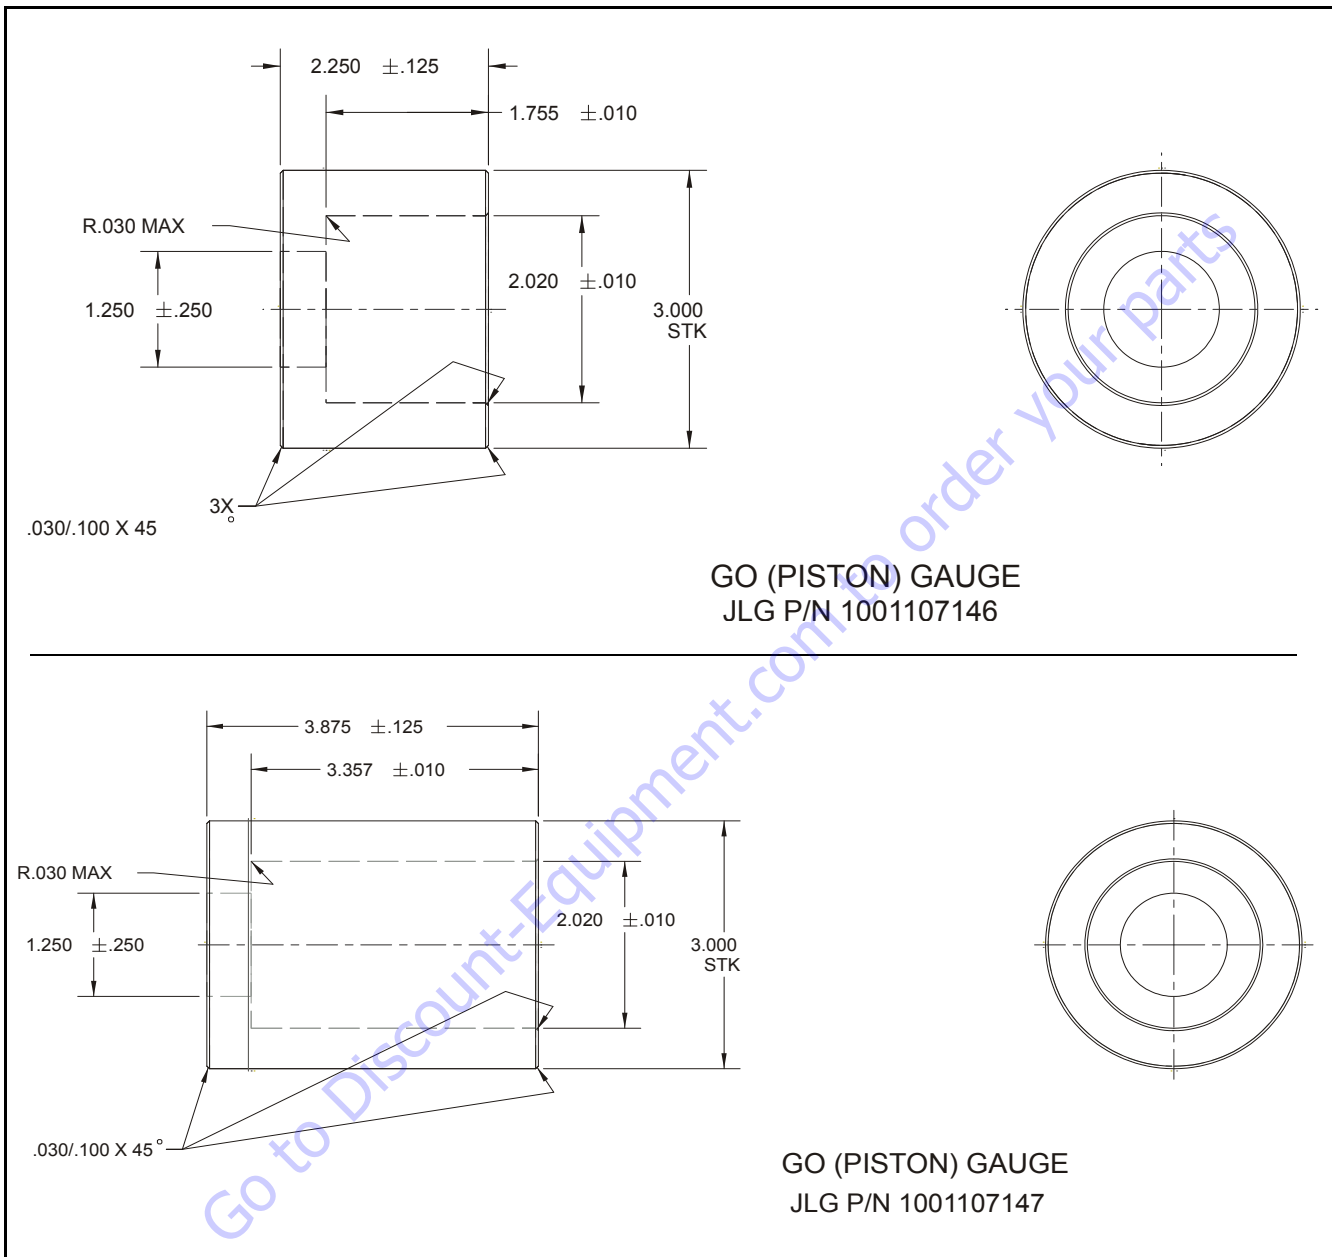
Special Tools for Tower Tele Cylinder - Sheet 2 of 2
